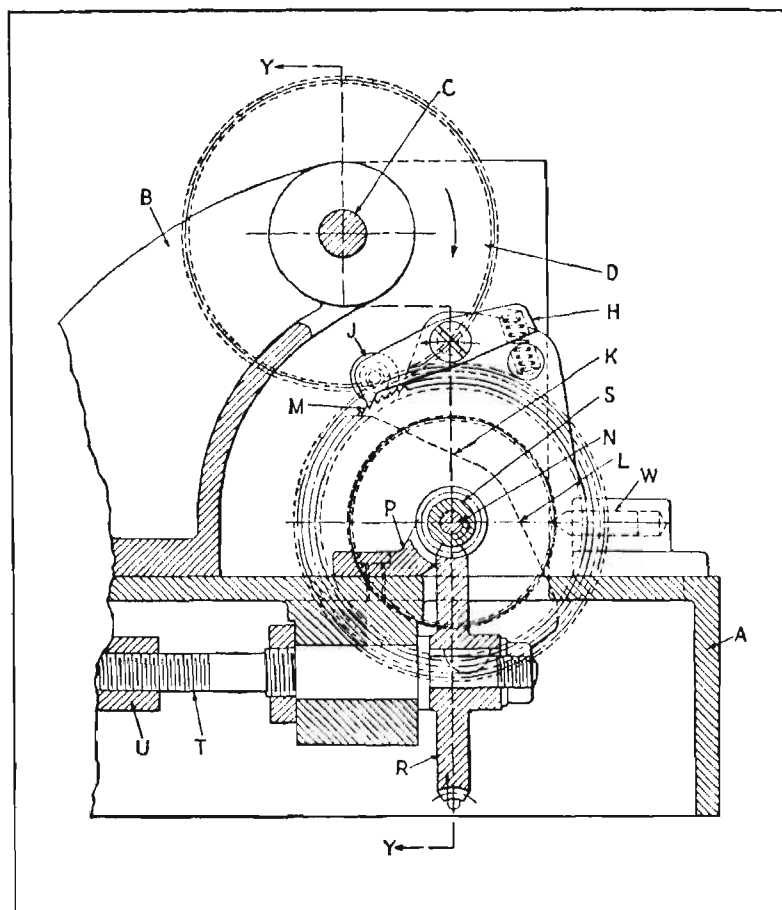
End View of Feeding Mechanism Taken Through Section X-X of Fig. 3.
